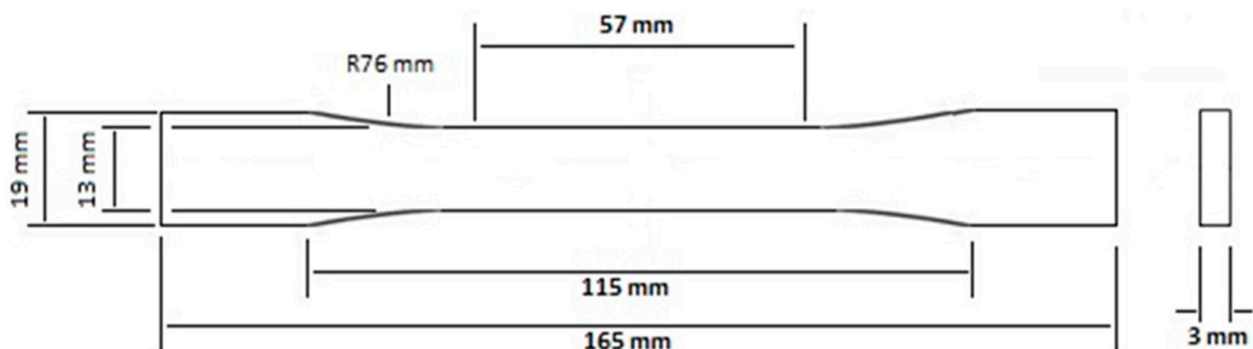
Tensile test specimen dimensions (ASTM D638-03 Type I).
